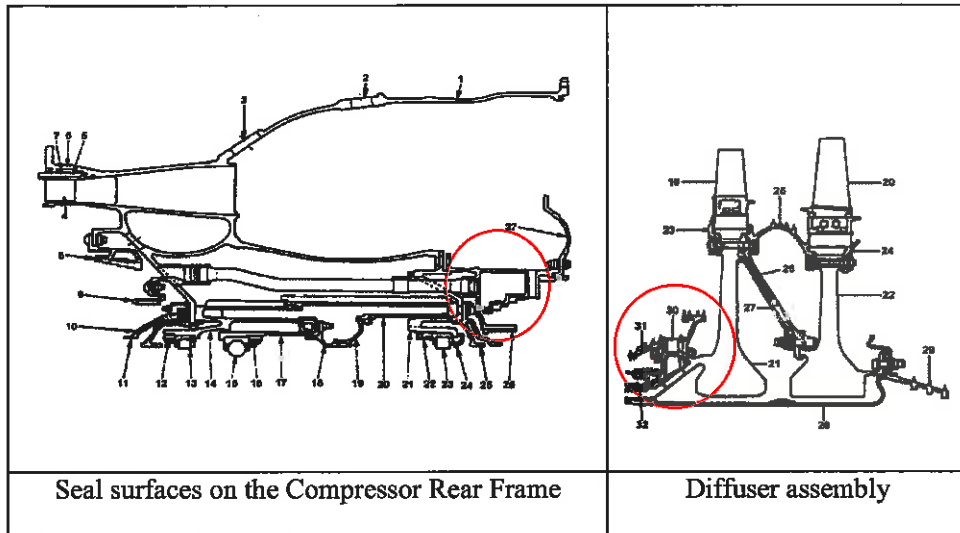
Diffuser Assembly and Compressor Rear Frame.
